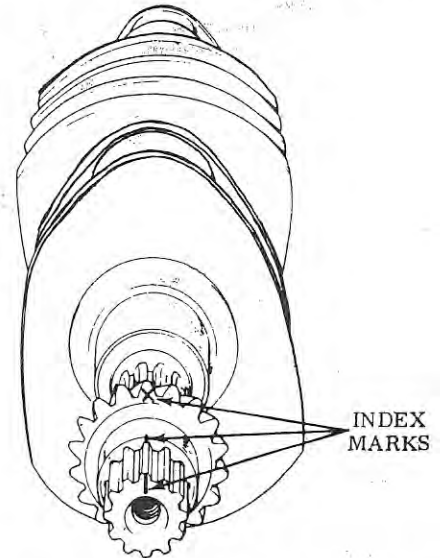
If the crankshaft timing gear is removed for other service, scribe a line on the spline nearest the gear timing mark as shown. If crankshaft is not marked, align the marked tooth with center line of No. 1 crankpin for proper valve timing.
